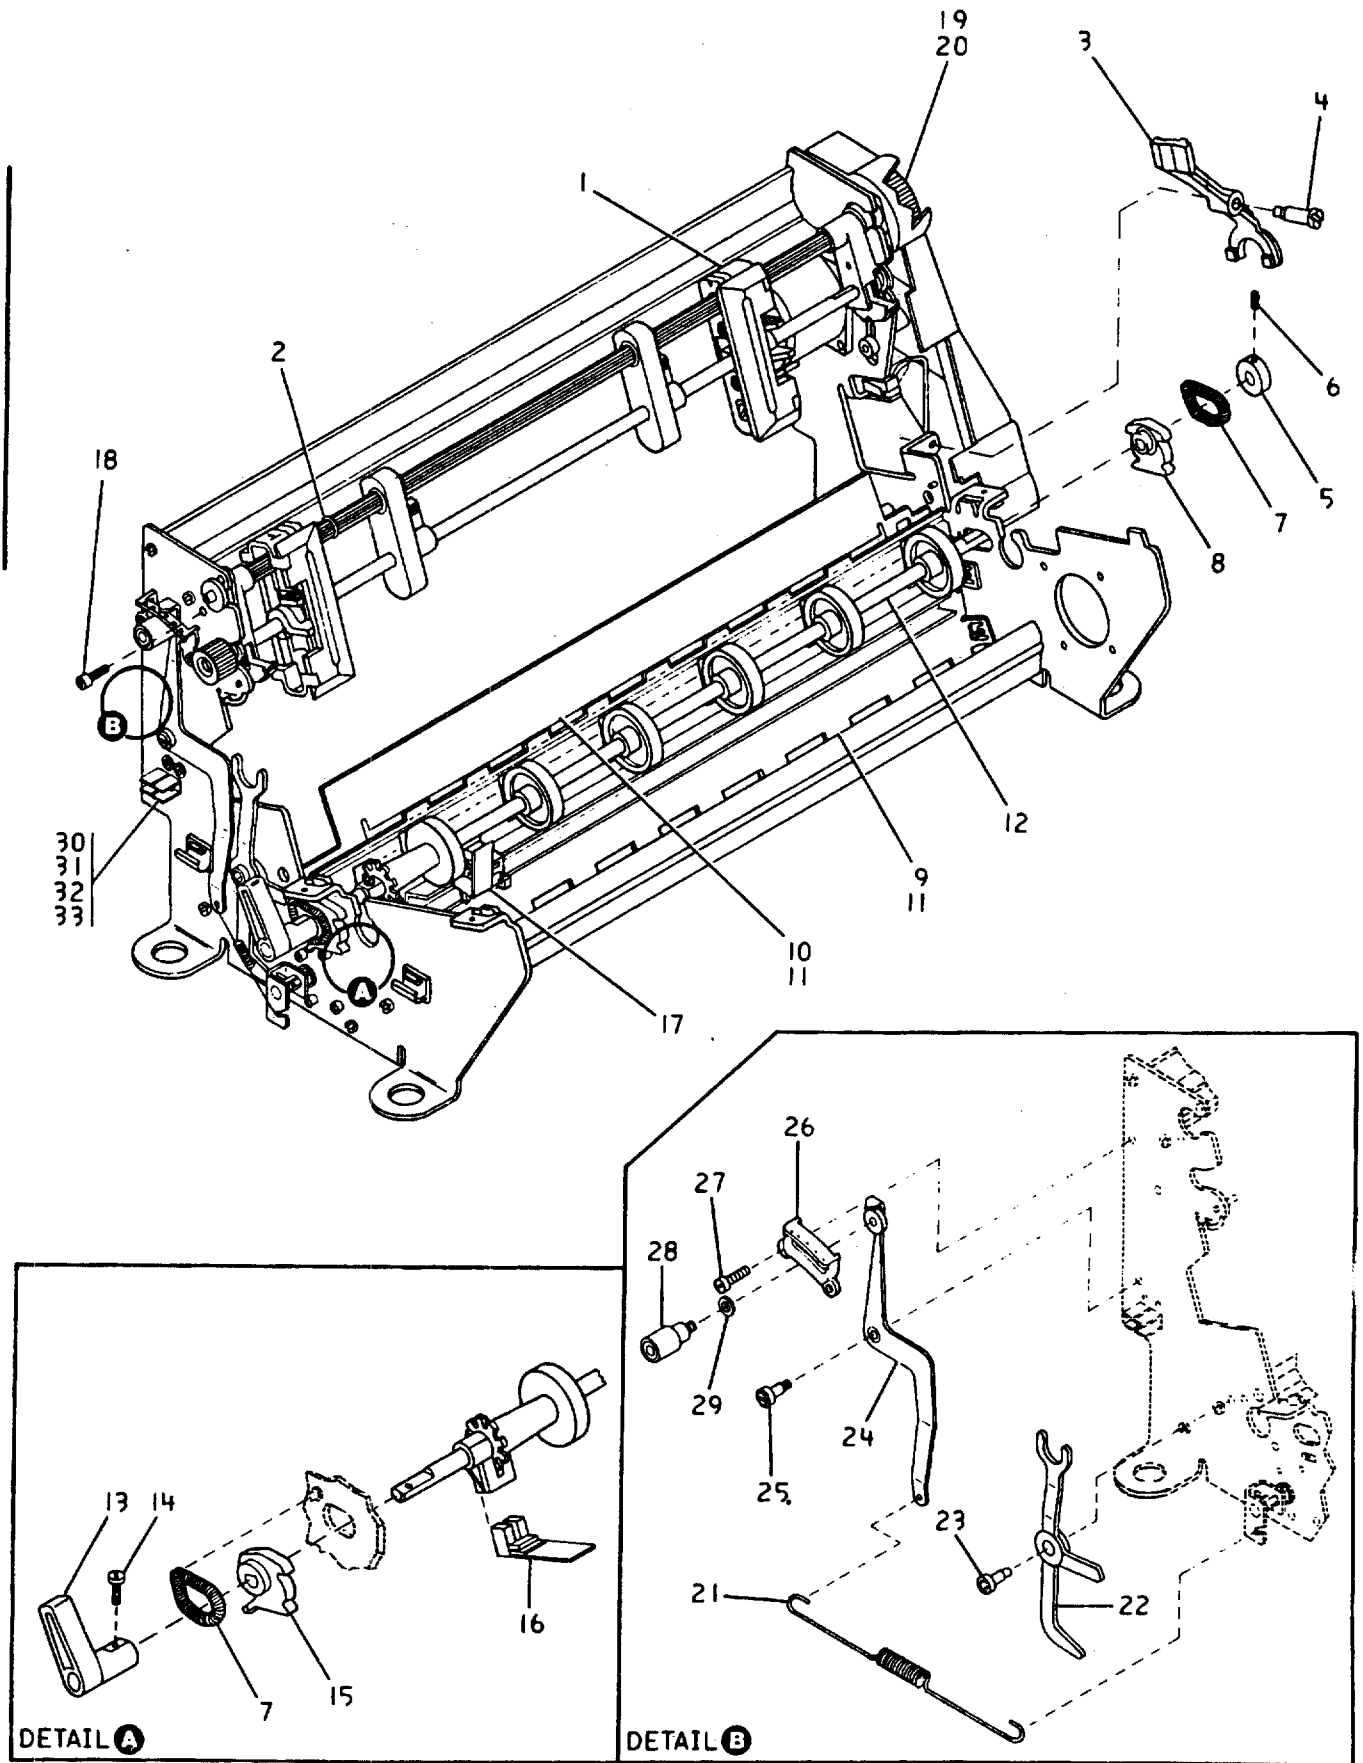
TRANSPORT ASSEMBLY (1 of 2)
